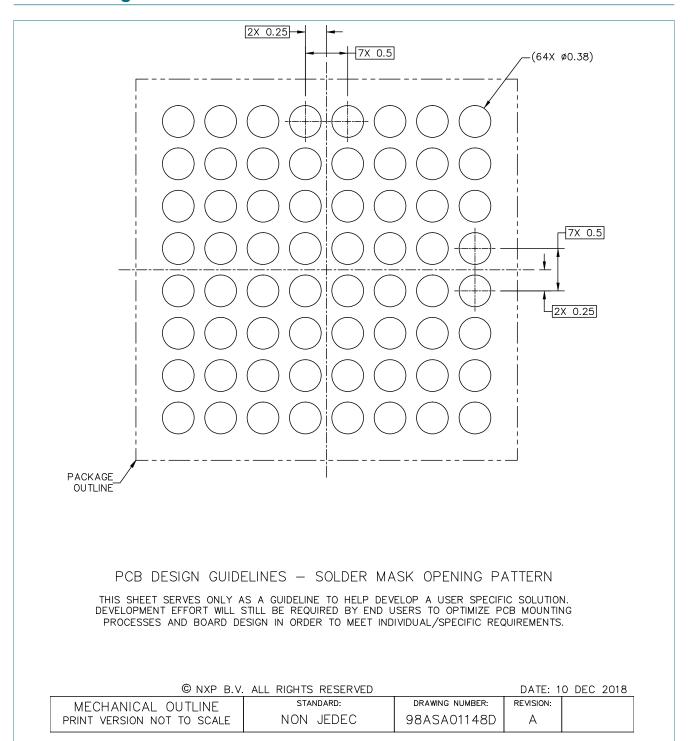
Reflow soldering footprint part1 for VFBGA64 (SOT1307-2)
